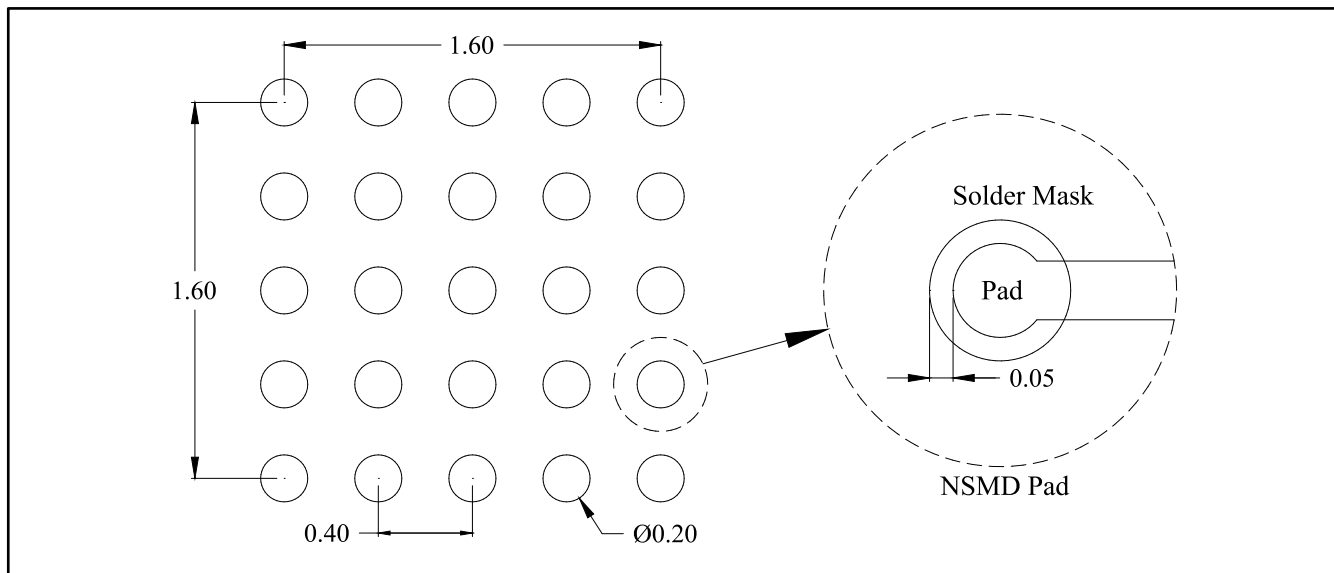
WLCSP 25B 2.1mm × 2.2mm package soldering footprint (NOT TO SCALE)
